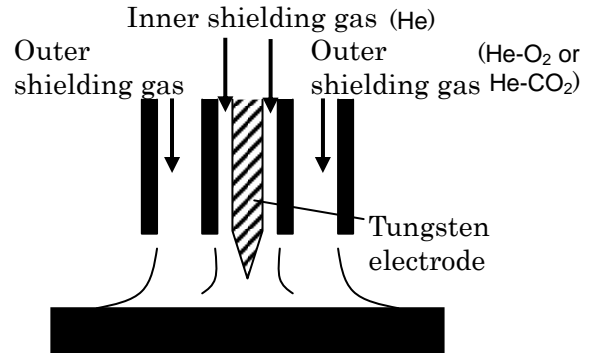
Schematic diagram of double shielding torch for TIG welding.
